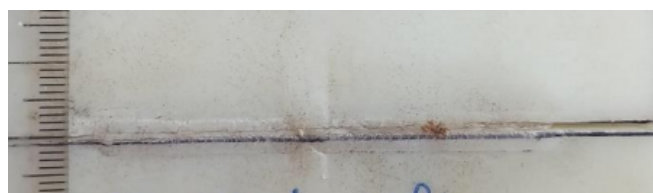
Spindle Speed at 180 rpm (Back View)
